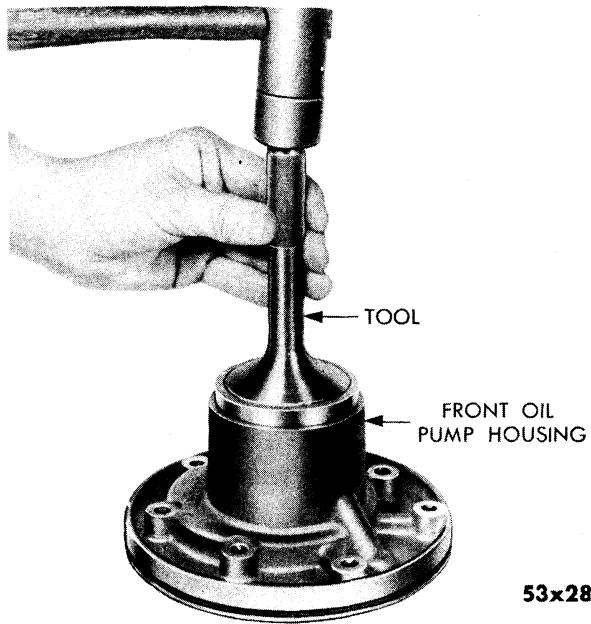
Installing Front Oil Pump Housing Dust Seal
